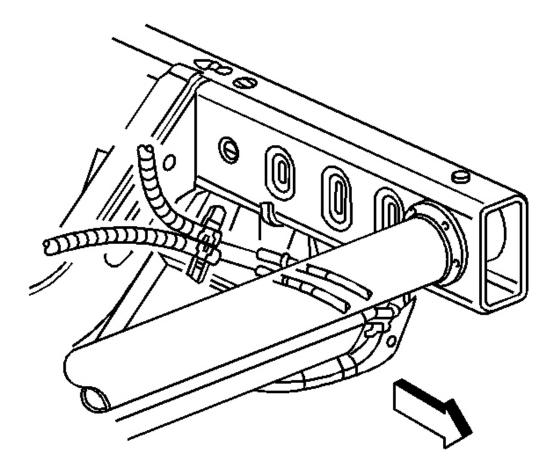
View Of Power Steering Hose Assembly At Power Steering Cooler Courtesy of GENERAL MOTORS CORP.
